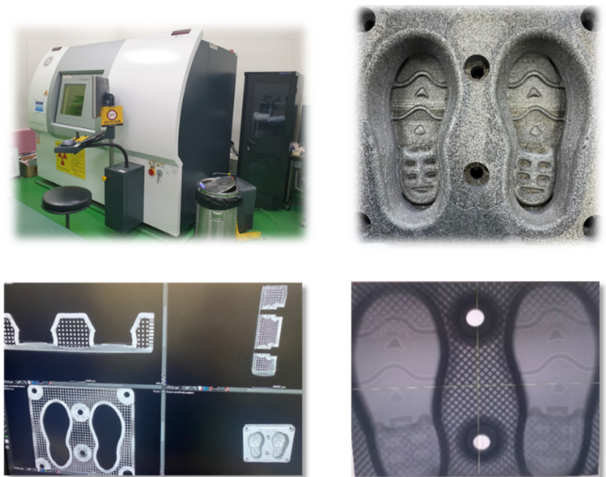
X-ray CT analysis for additive manufactured shoes mold to find defects inside
